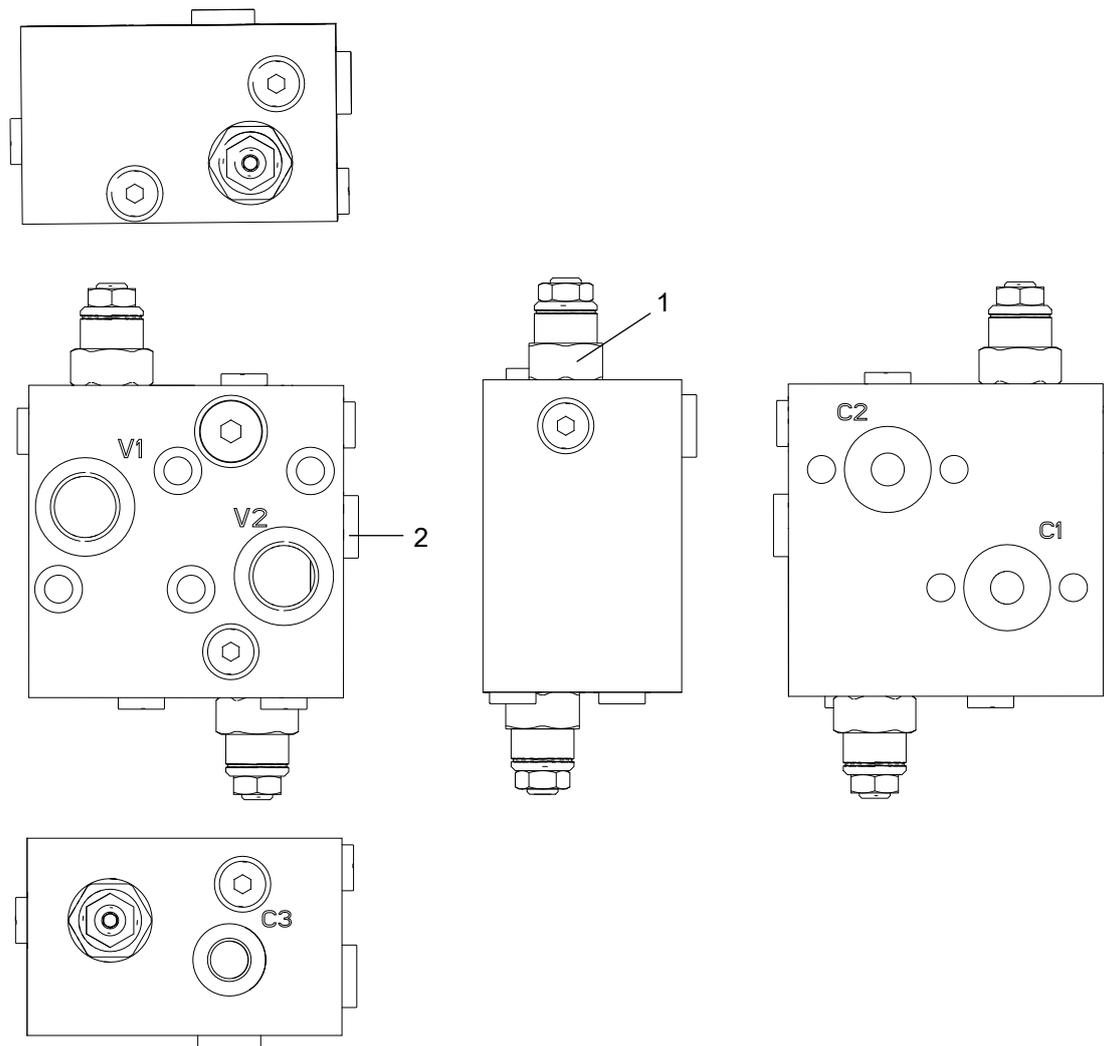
Slewing Cushion Valve (PN.202040003061)
